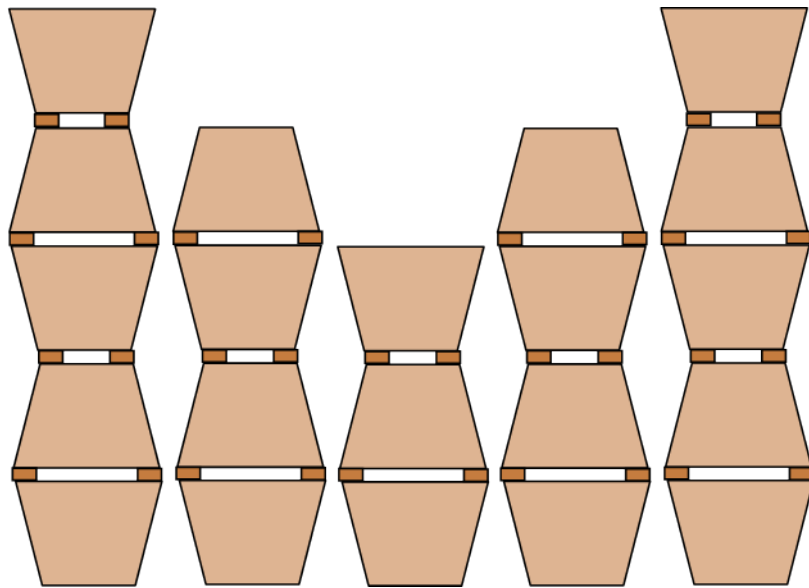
Vertical Layout for Stacking of Filters in Kiln - Doorway
